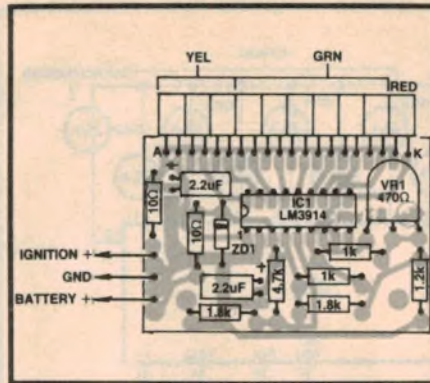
it should only take you a few minutes to assemble the PCB. Take care with component orientation.
